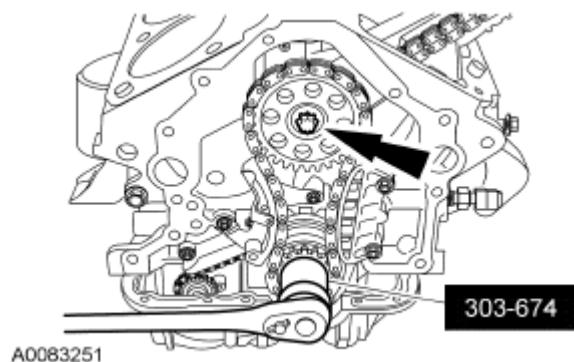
Locating Front Sprocket Retaining Bolt And Special Tool
